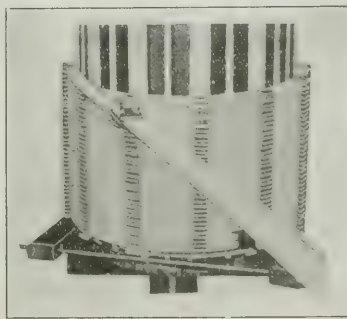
HELICAL L.P. COIL BEING WOUND ON INSULATING CYLINDER.
